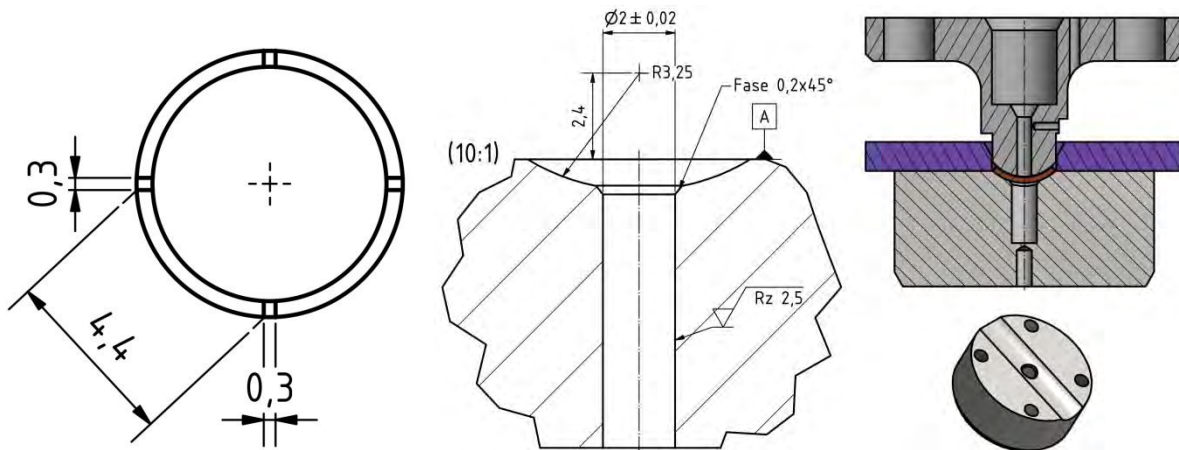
Small punch test specimens (left) and lower die geometry (right)
